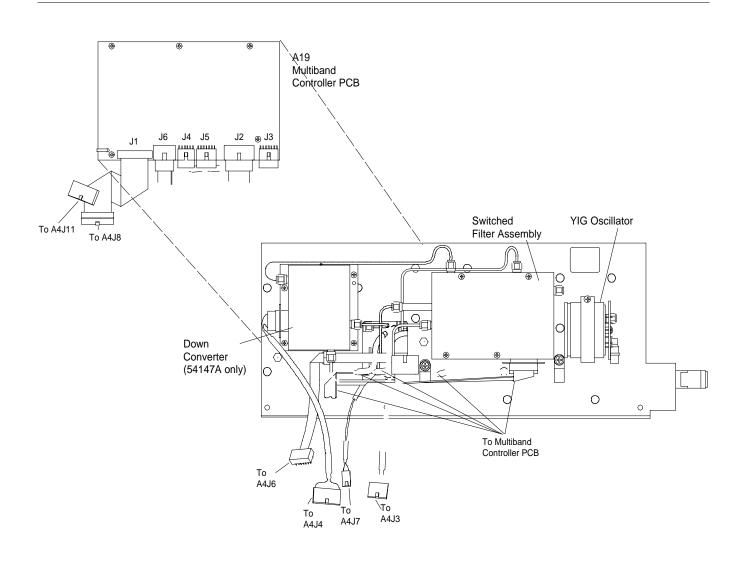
Models 54137A and 54147A RF Deck Parts Location (Internal Side Detail)
